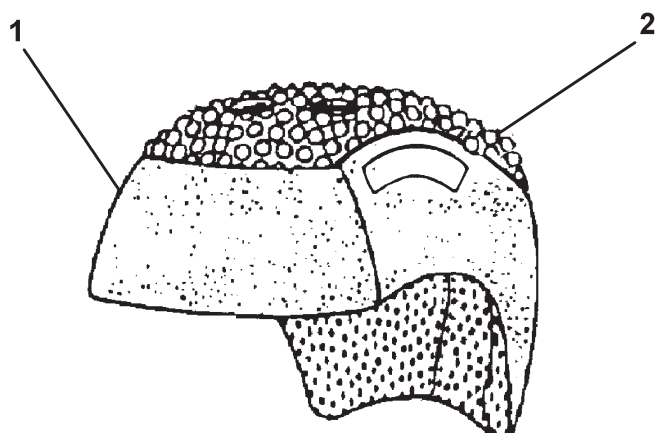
Thermoplastic Liner (TPL) Assembly
